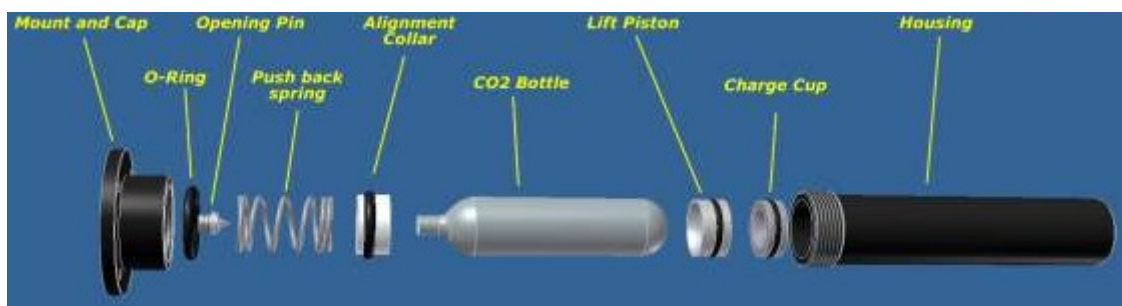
Exploded view of the Peregrine compressed CO₂ ejection system.
